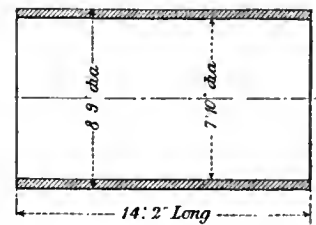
TURBINE DRUM FORGED AND EXPANDED.
